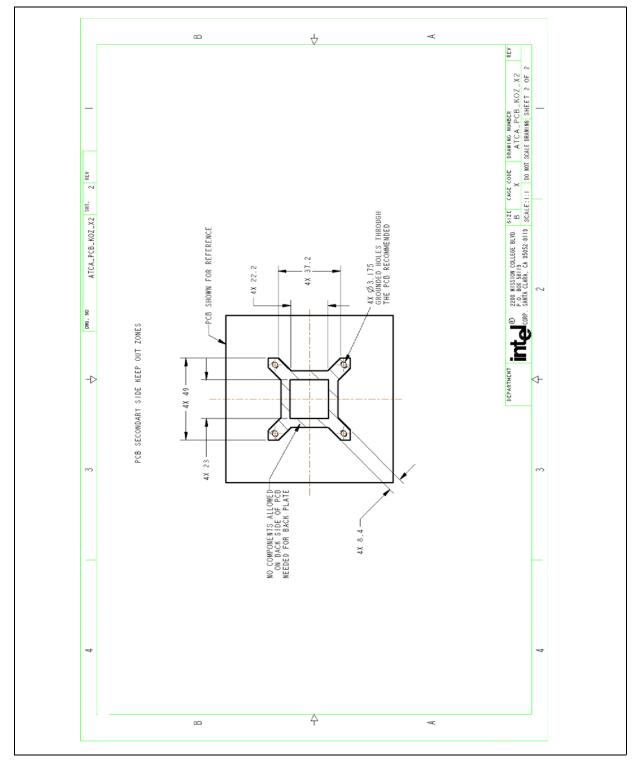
AdvancedTCA* Reference Heatsink PCB Keep Out Zone Requirements (Sheet 2 of 2)
